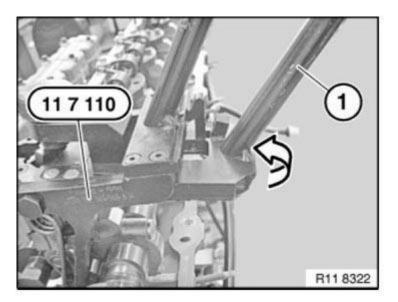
Identifying Return Spring With Lever And Special Tool 11 7 110 Courtesy of BMW OF NORTH AMERICA, INC.
